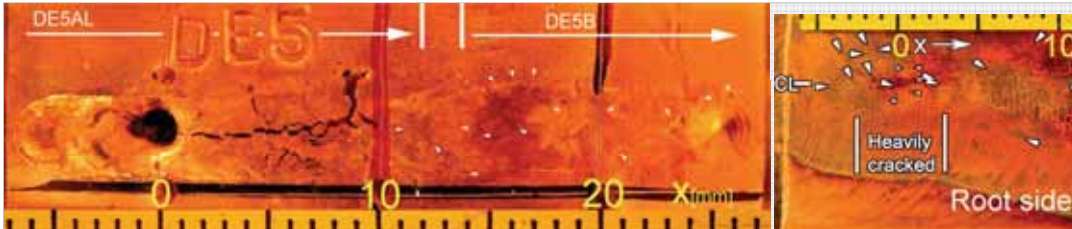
This La-doped weld is the only Varestain-tested weld, showing clear non-centerline cracking. La causes more arbitrarily oriented cracks than any other of the tested dopes. The cracks advance readily over the weld toe. White triangles point at chosen cracks. After the bend is finished the cracks become all but invisible. Lanthanum causes in copper treacherous cracks so evenly distributed that they probably relax stresses stopping the further opening of the crack. [De500\_C10\_Tx.jpg] [De501\_C10\_Tx.jpg]
